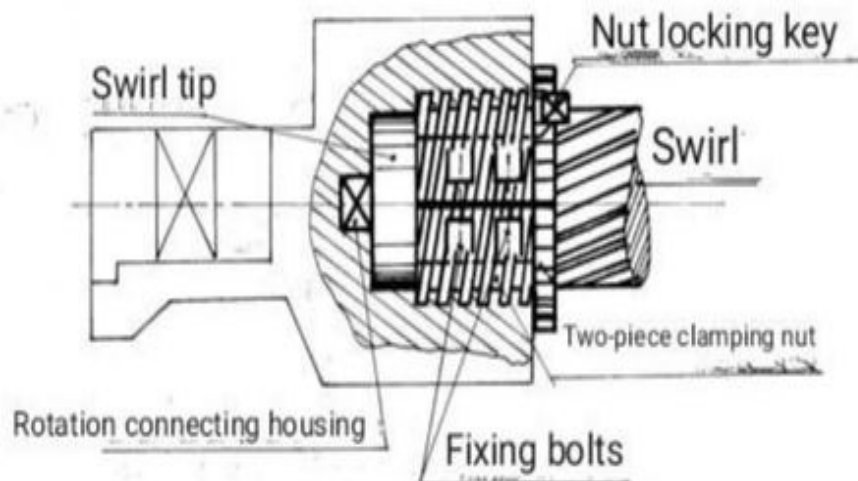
Mandrel holder fixed to the swirl tip with a two-piece clamping nut [6].
